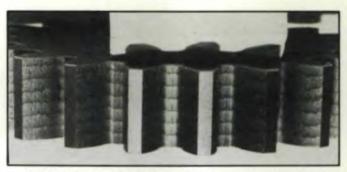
Hobbed finish of left-hand gear in Fig. 6 as produced by a 4-in. dia., 10-flute, single-thread hob rotating at 71-rpm and fed at 0.150-in. per revolution.
